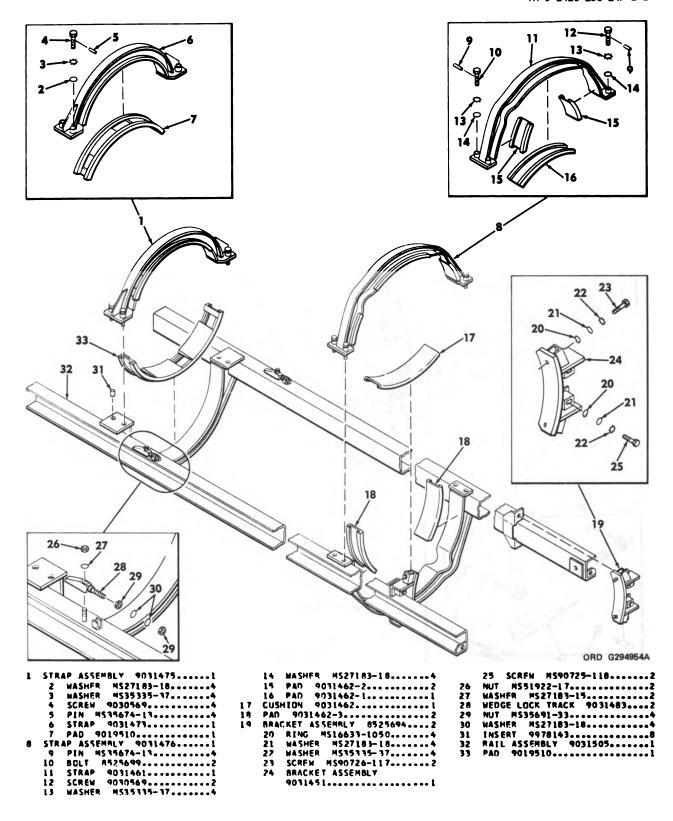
TRACK ASSEMBLY, MOVABLE, AFT BODY /9031499/ /SEE FIGURE 126 FOR NEXT HIGHER ASSEMBLY/
